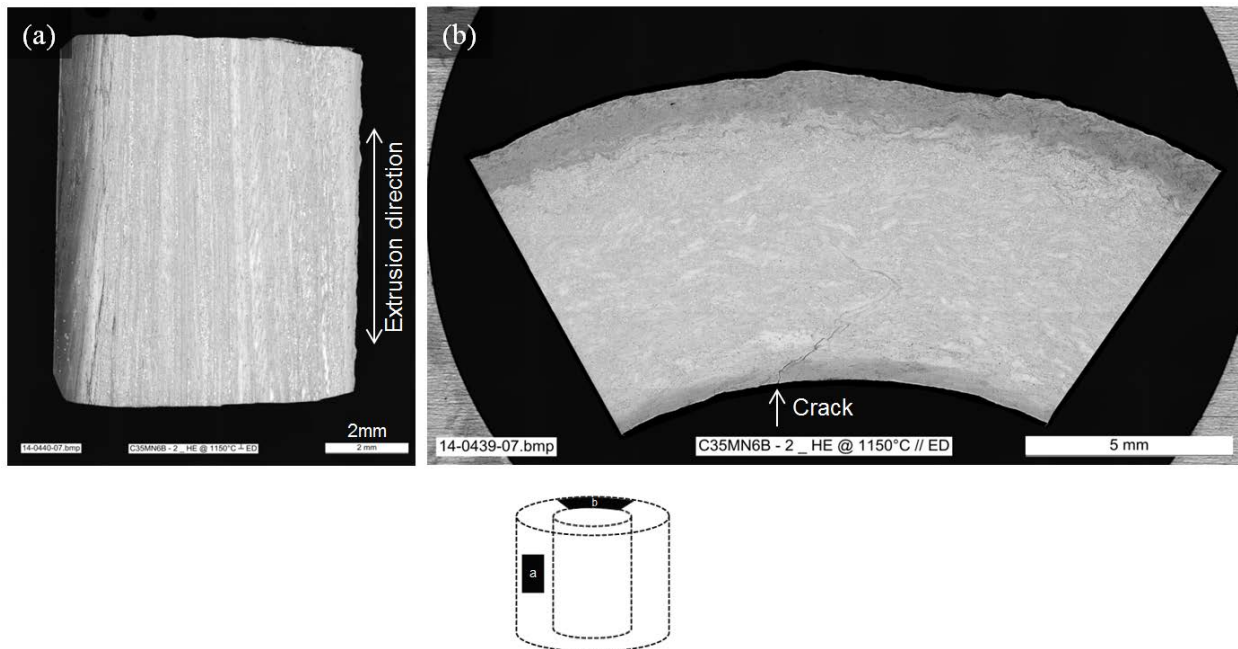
Montage of the cross-sectional micrographs showing as-extruded macrostructure of C35MN6; (a) longitudinal section, and (b) transverse section
